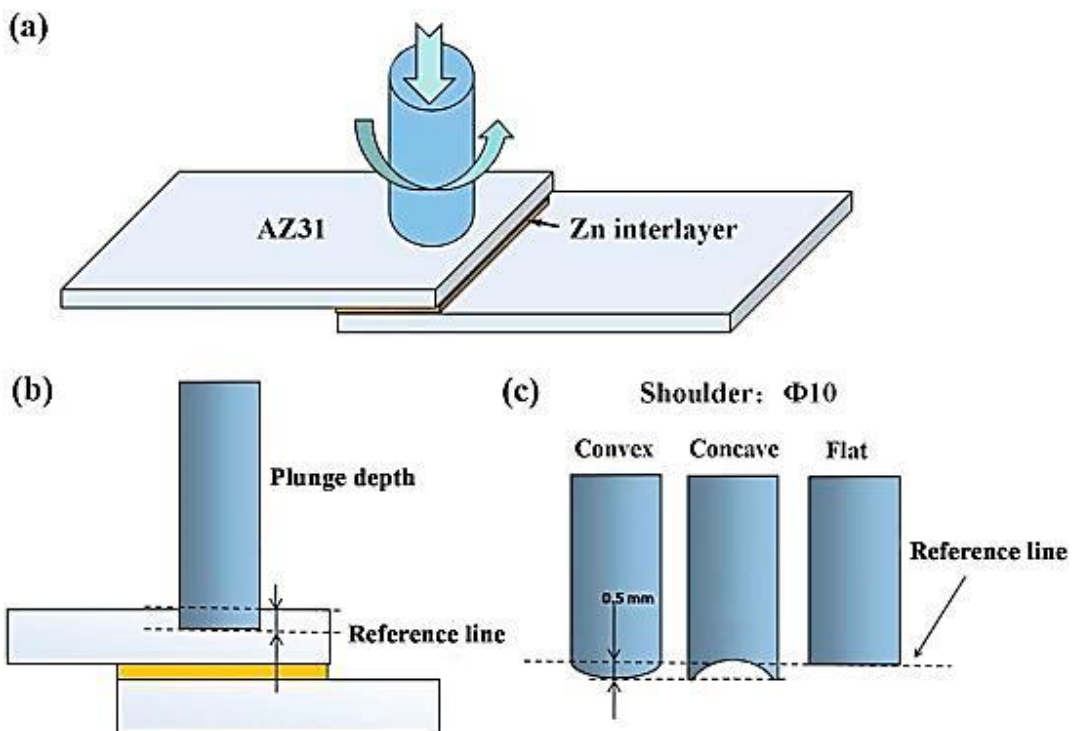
Pinless-Friction Stir Spot Welding (P-FSSW) (Tozaki, Uematsu, and Tokaji 2010)
